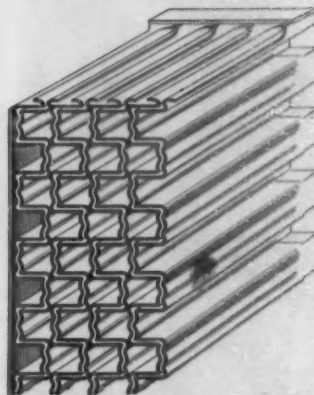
RADIATOR FORMED OF CORRUGATED METAL SHEETS.
